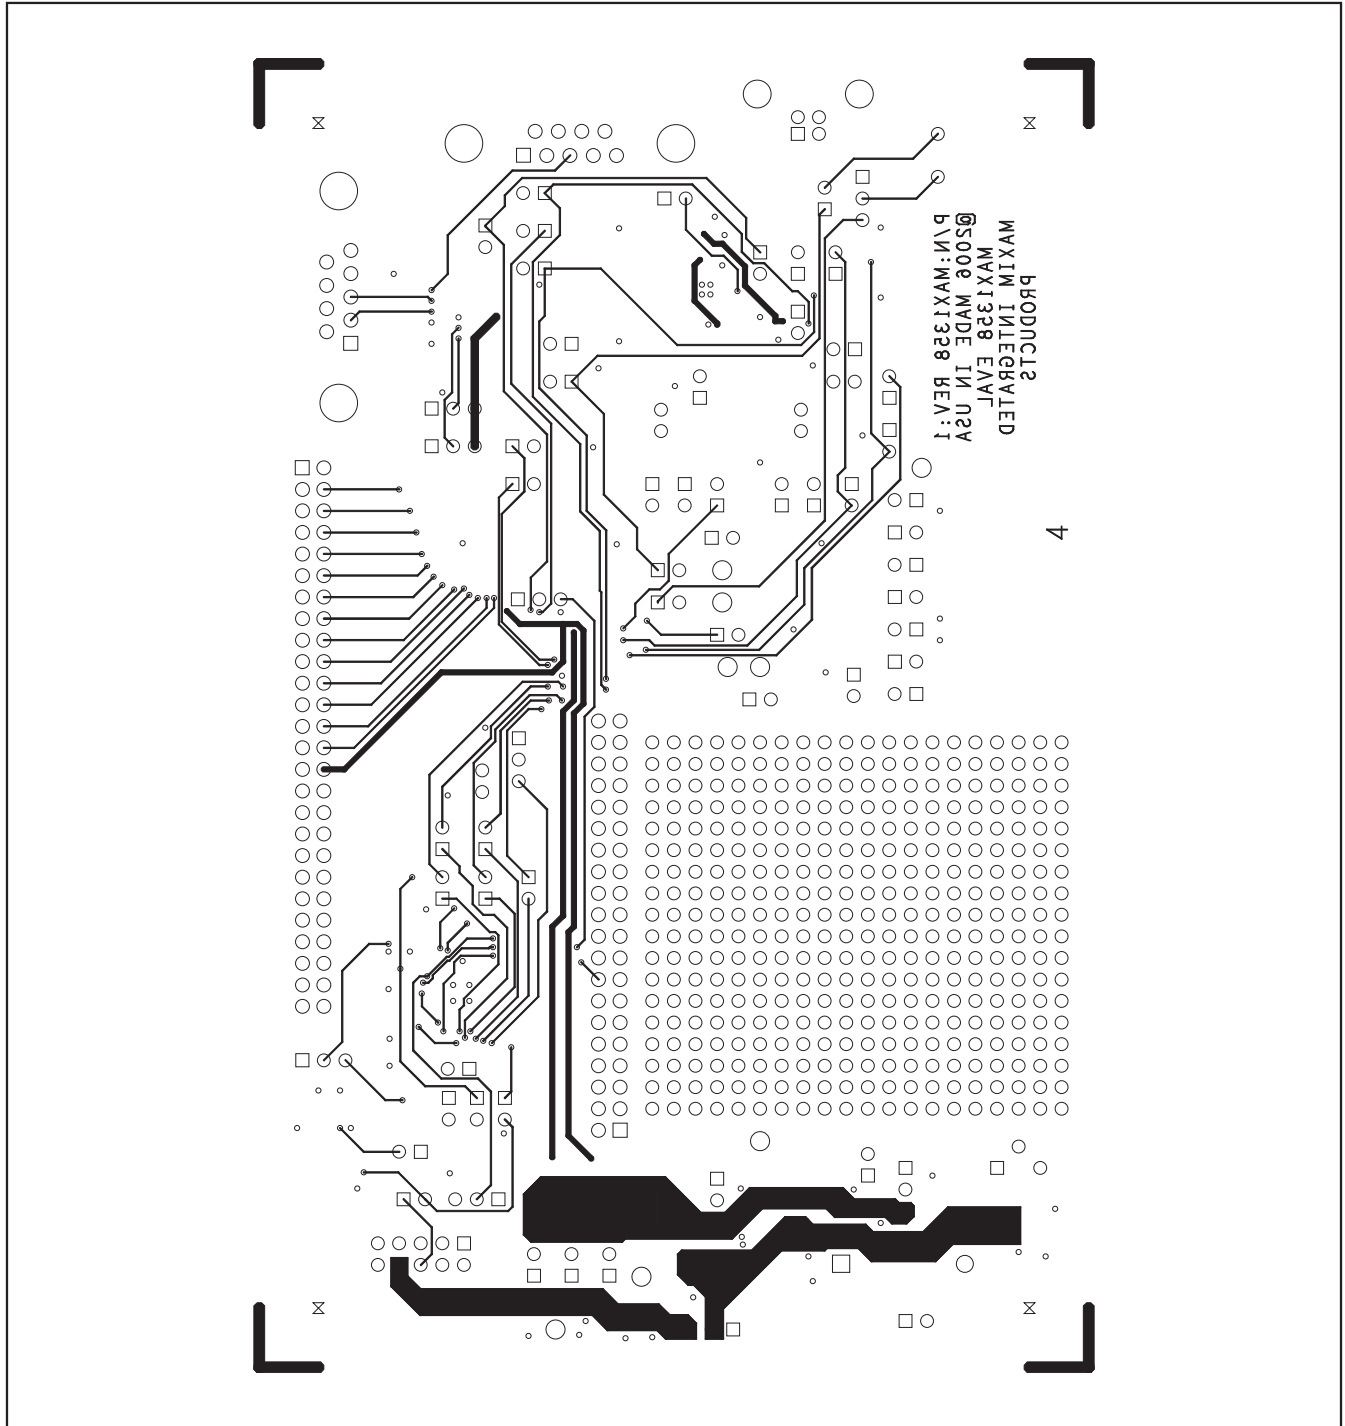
MAX1358 Evaluation Kit PCB Layout—Solder Side
